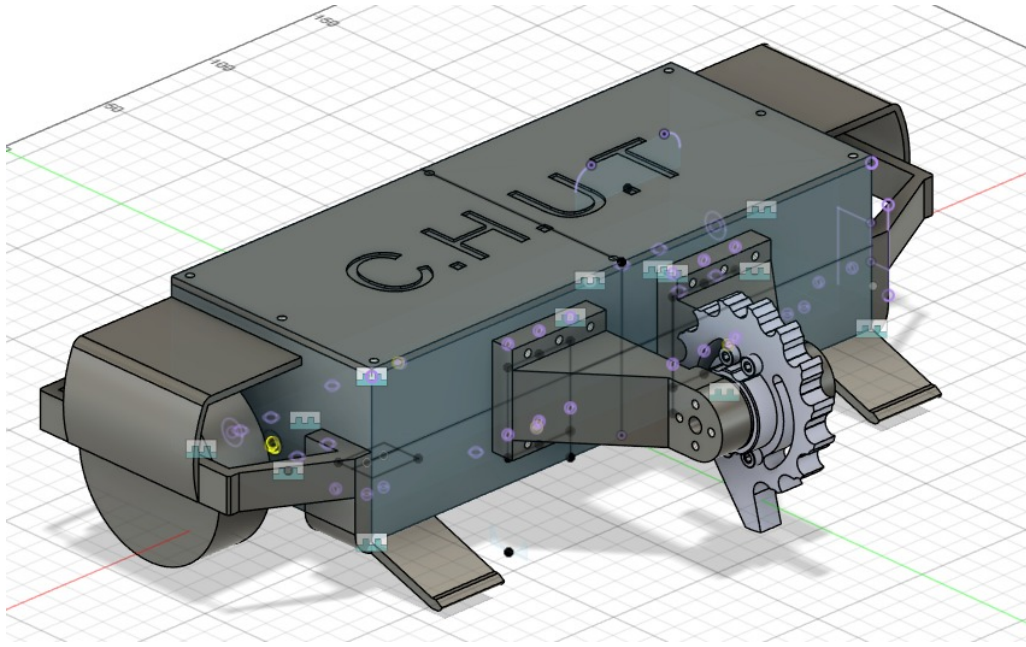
Final CAD assembly showing the rectangular chassis, printed lid, rear-biased wheels, front skids, wheel protection, and front-mounted weapon assembly.
